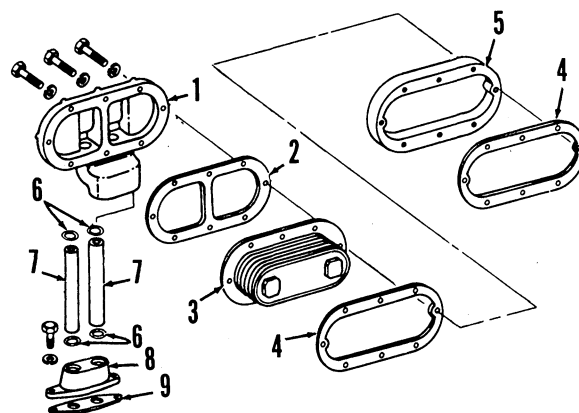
Exploded view of engine oil cooler assembly. Spacer (5) is not used on Model 4050.
